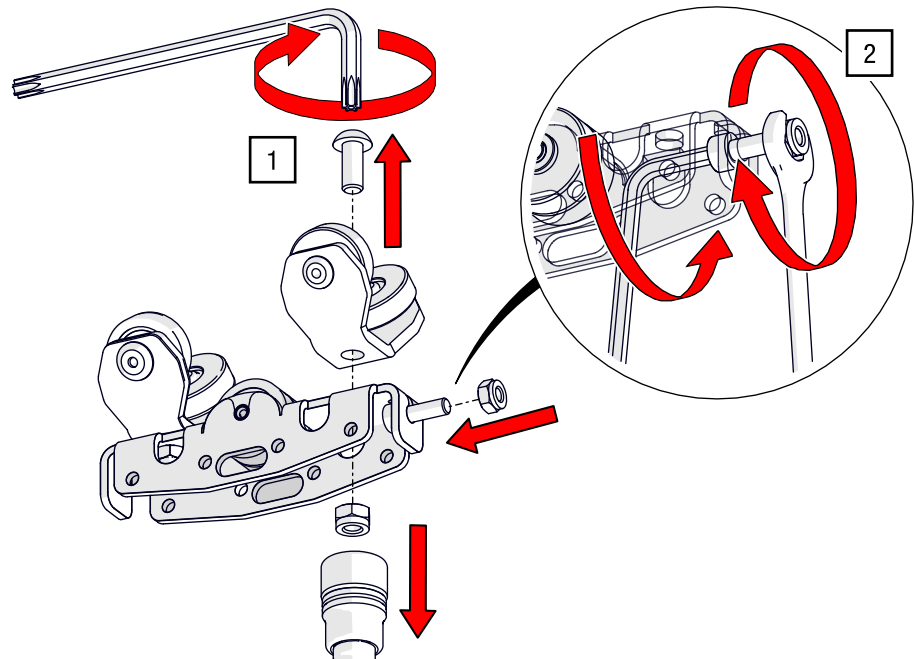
Master runner with add-on brake – Mounting the screw for magnetic coupling
